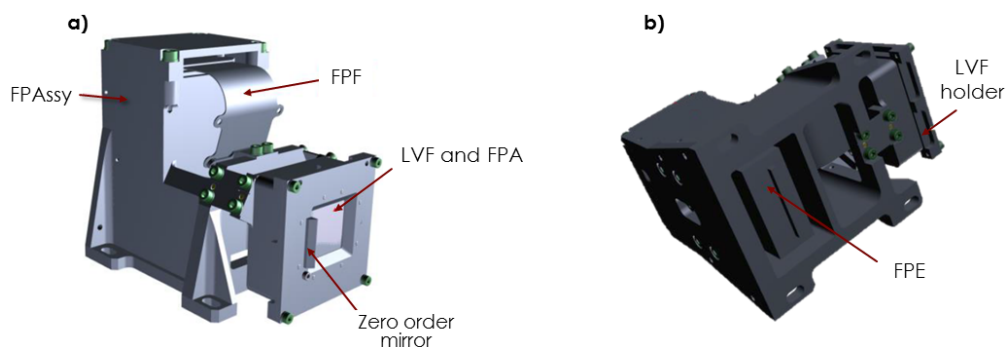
General views of the MAJIS VIS-NIR FPU: a) Frontal-top view, b) Rear-bottom view.⁴
